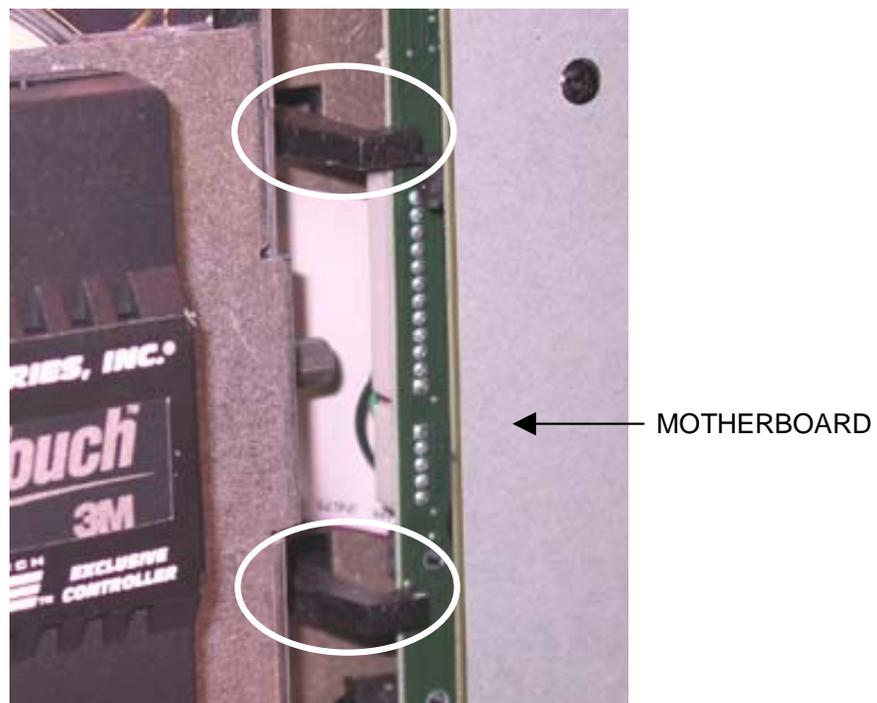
BRACKETS SECURING OPPOSITE SIDE OF MOTHERBOARD ASSEMBLY
